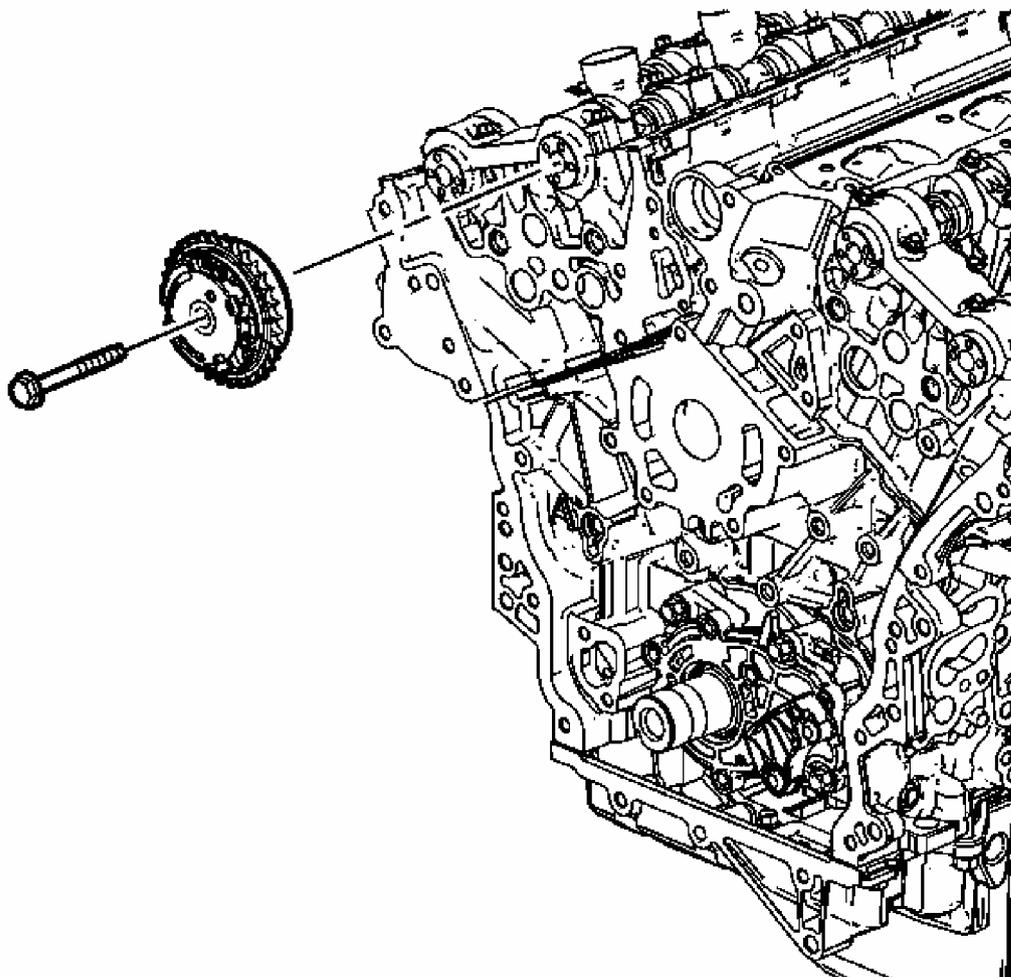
View Of Camshaft Position (CMP) Actuator - Bank1 Intake
